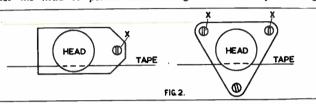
Two types of head mounting which permit azimuth adjustment are shown here. The bolts X are spring-loaded, and raising and lowering is achieved by small turns with a screwdriver.
